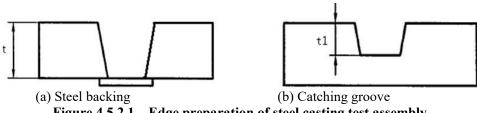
Edge preparation of steel casting test assembly
